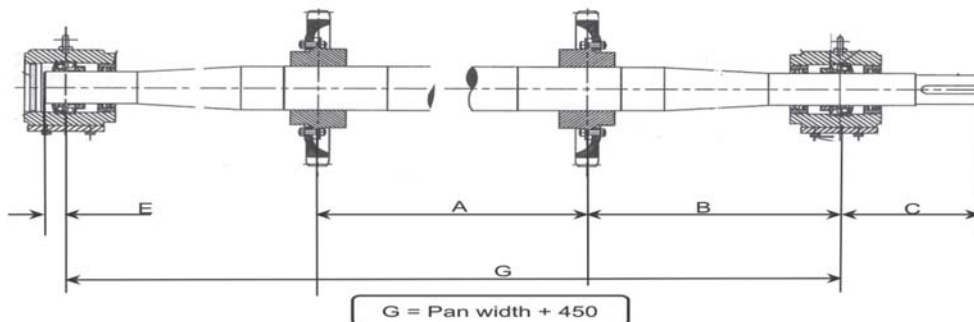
Relation for location of subassemblies in Direct type Drive Wheel Assembly
